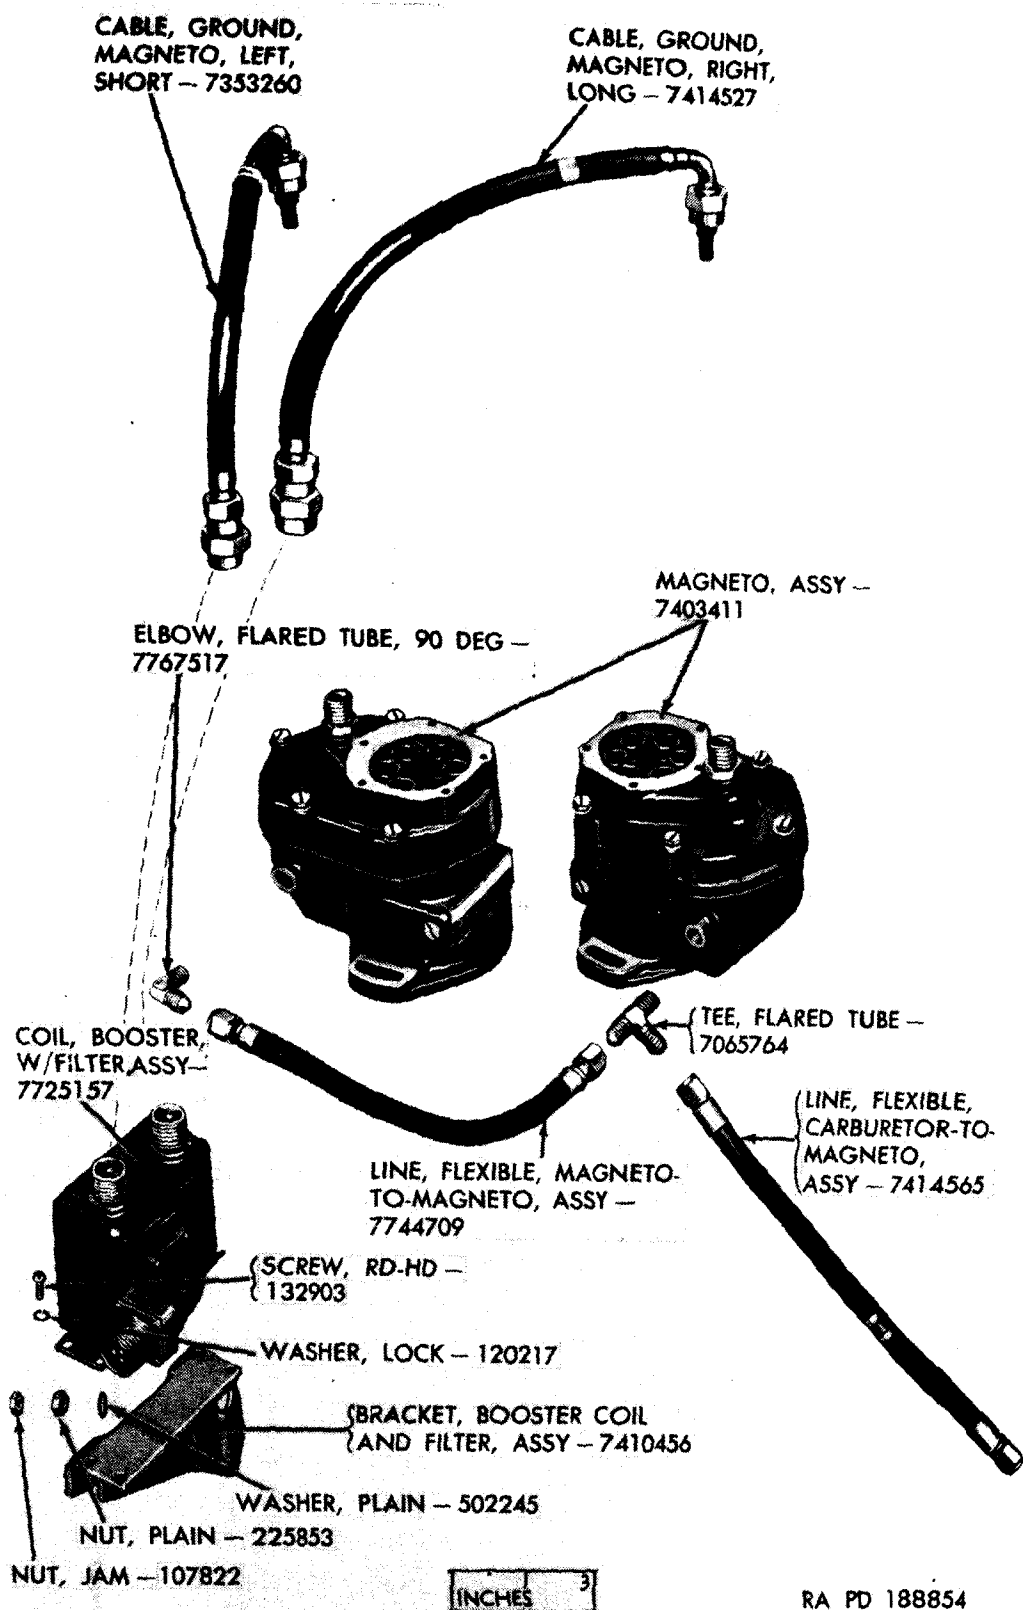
Magnetos, booster coil, and vent lines—exploded view.
